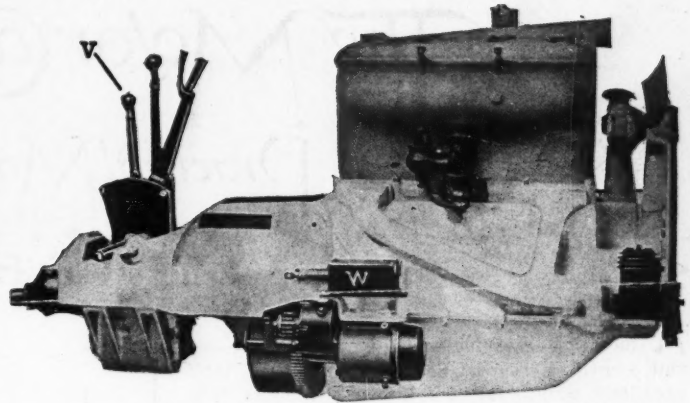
Method of mounting 1914 Wagner starting motor and starting switch on engine. Switch W is controlled by lever V
